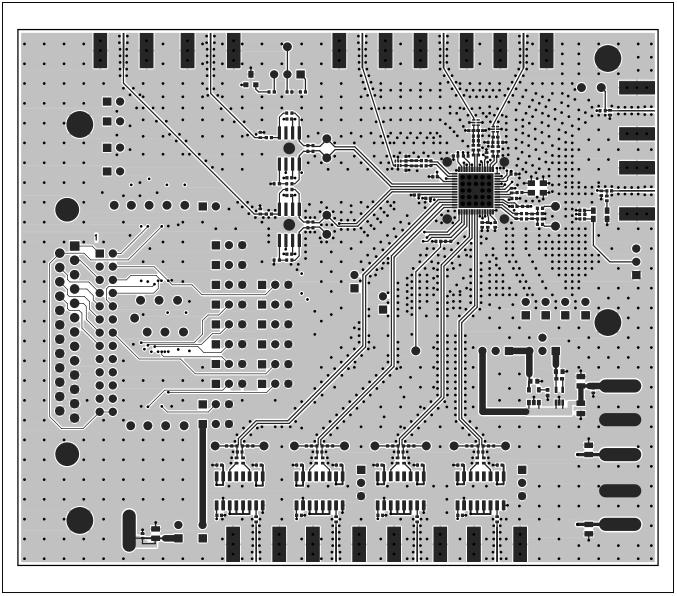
MAX2839AS EV Kit PCB Layout—Component Side
